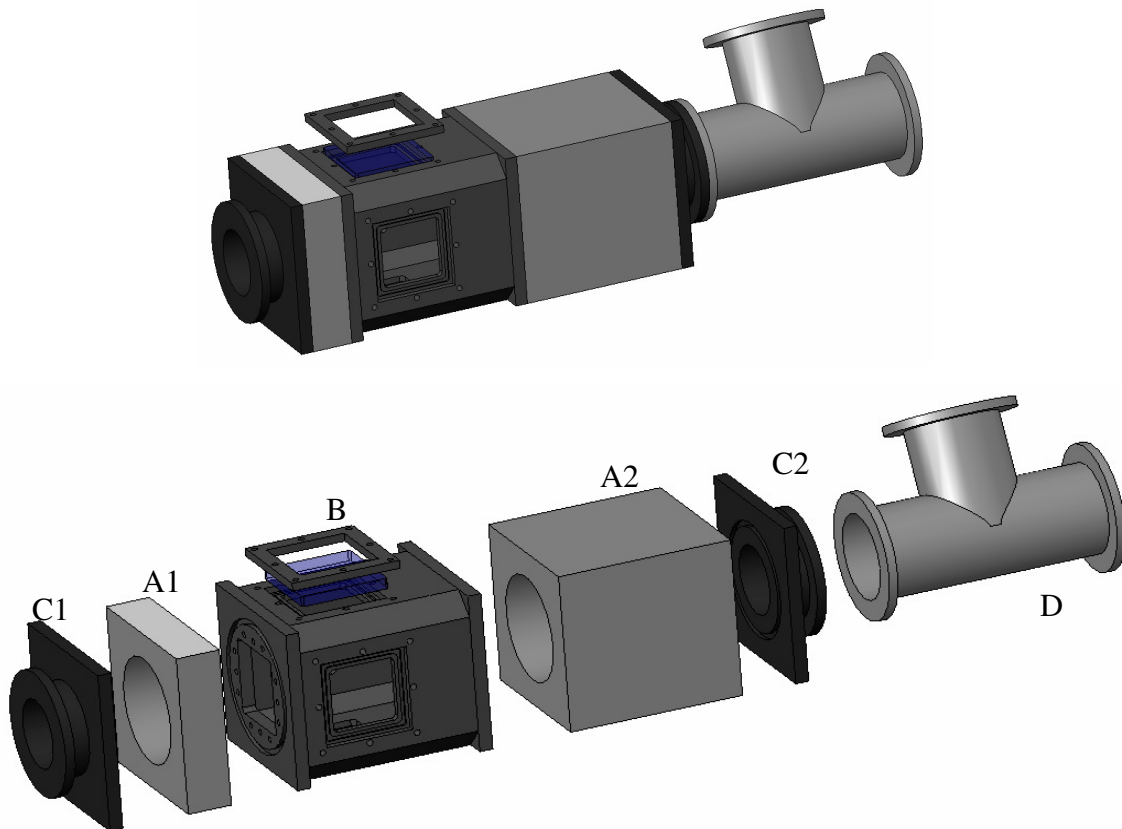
SQUID Chamber assembled and exploded view (second version)
